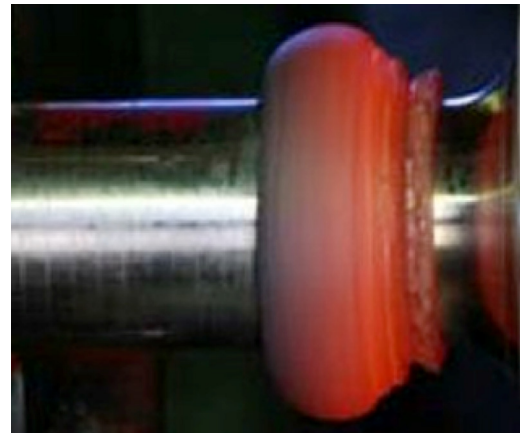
Material being extruded out of the area of contact during dissimilar metal friction joining.
